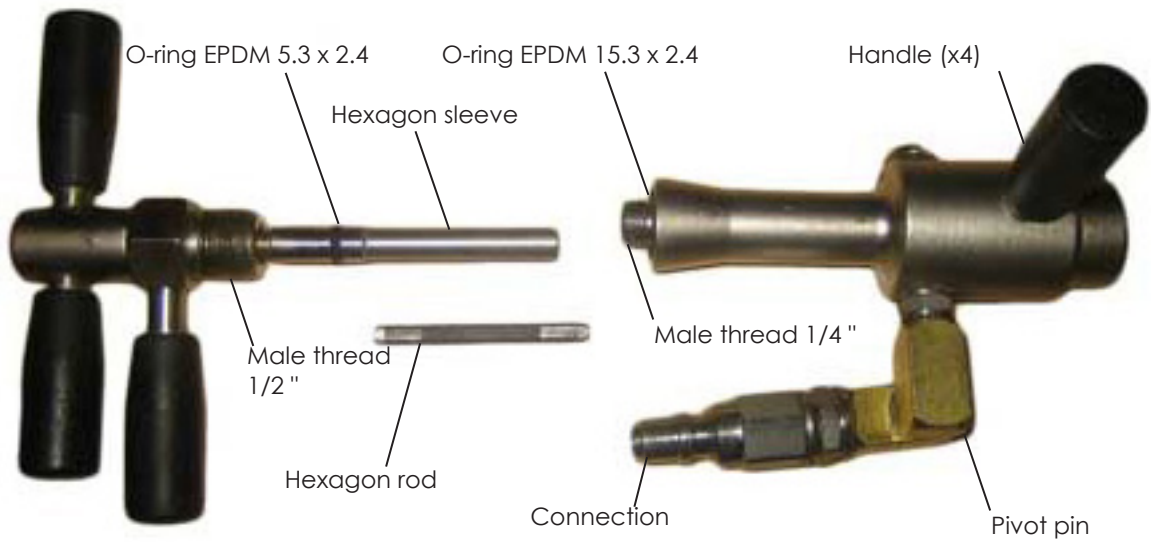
Filling tool (Part no. 1800 and 1800_L)
